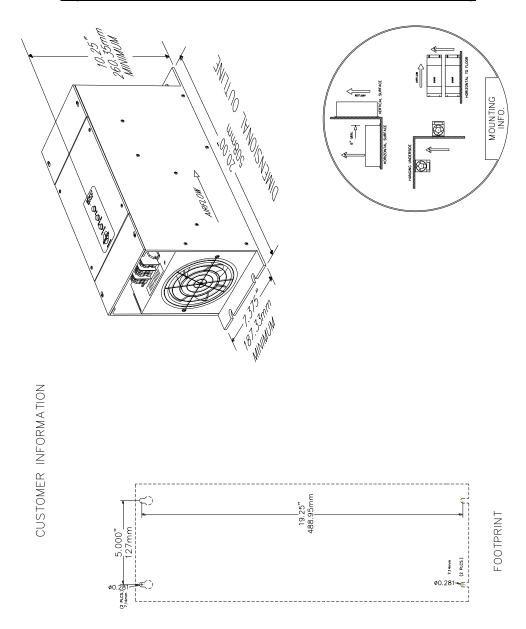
M3452 K9 Chassis Dimensional Outline Drawing
